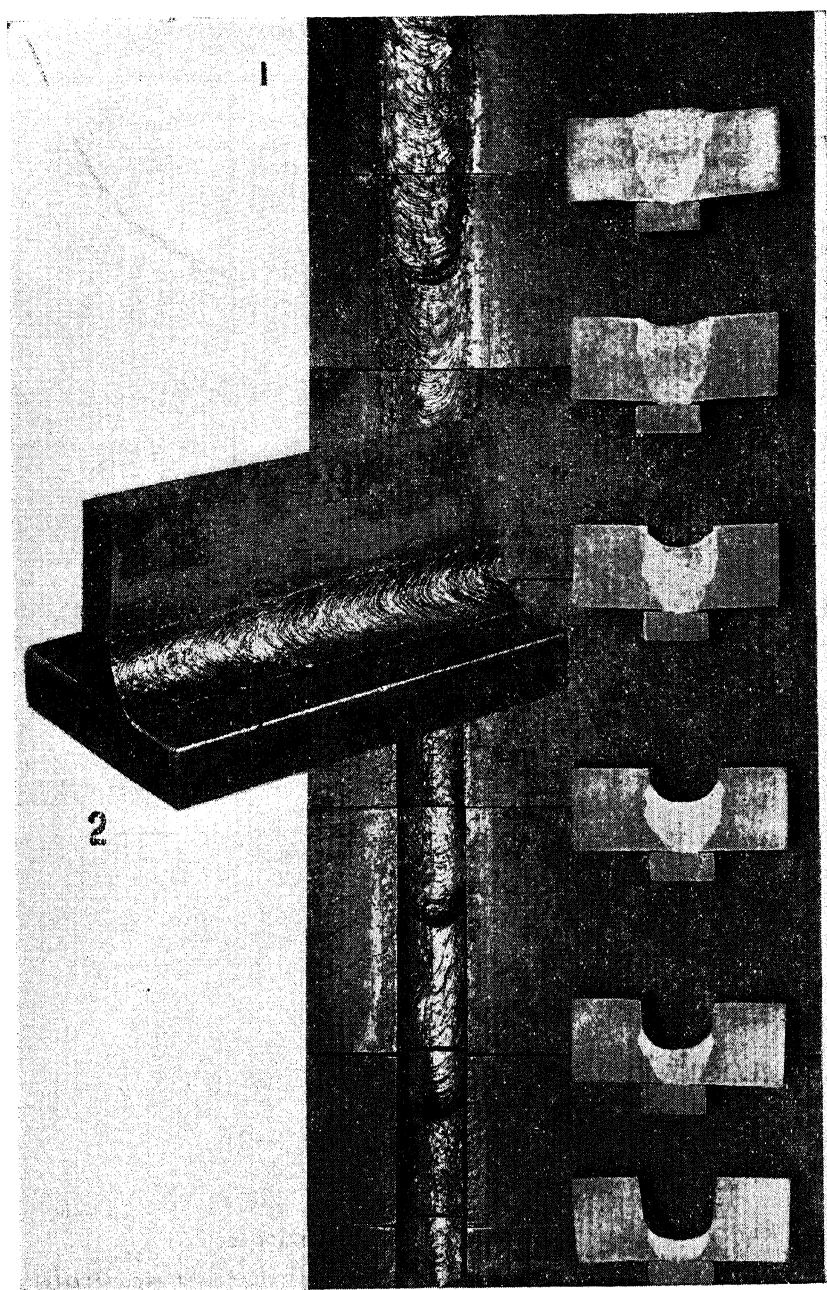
A. Welds produced with Type C Electrode in mild steel. (1) Deep groove joint showing cross-section of various passes. (2) Fillet weld in $\frac{1}{2}$ -in. plate, tilted position.
